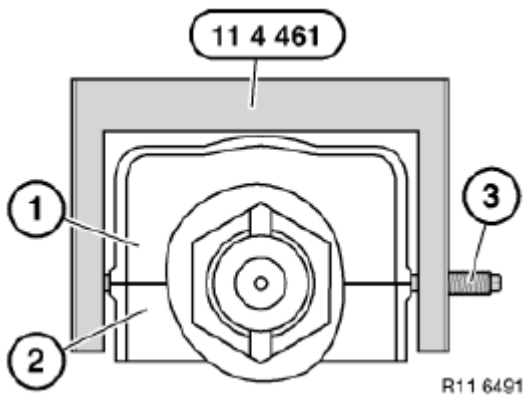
Identifying Screw, Upper And Lower Bearing Bank With Special Tool (11 4 461)
